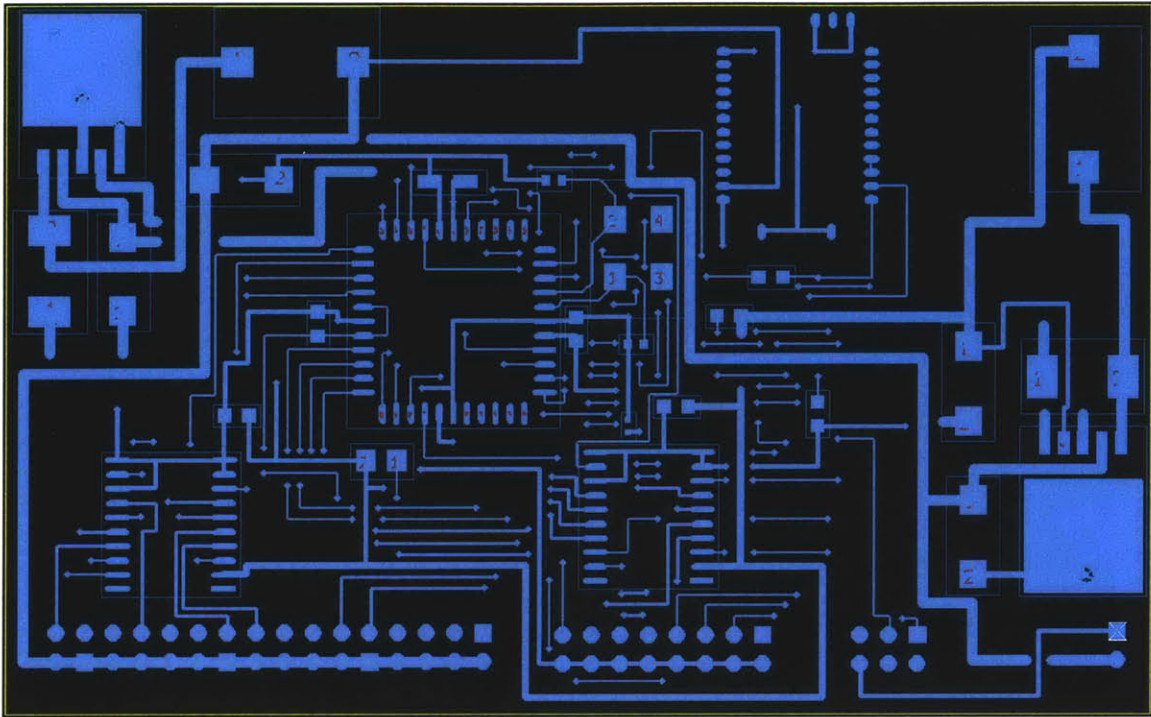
Top layer of PCB layout (from OrCAD Layout Plus).
